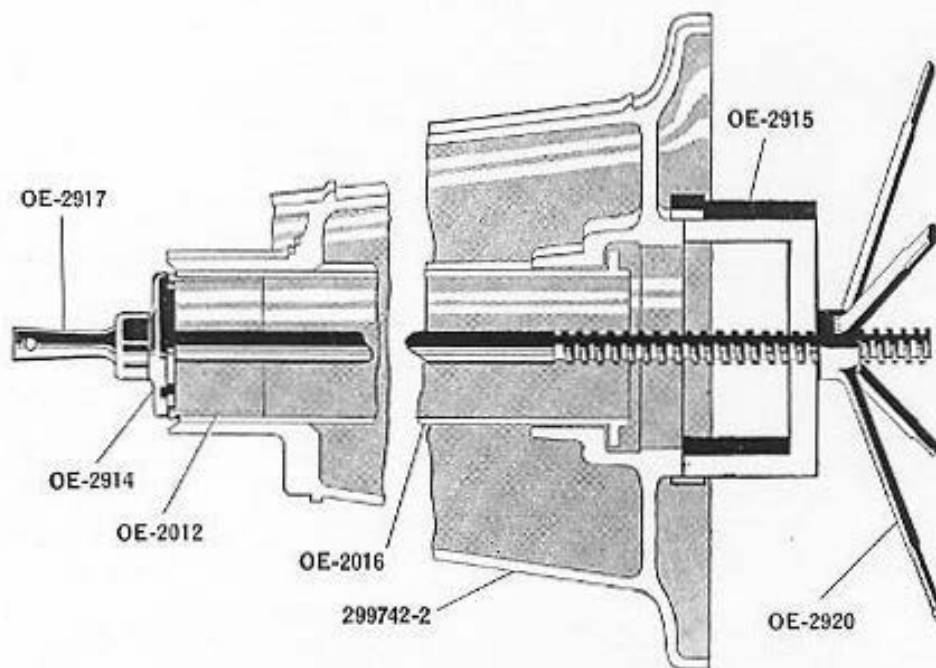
Removing column guide bushing (OE-2016) from fixed pedestal casing (299742-2)
